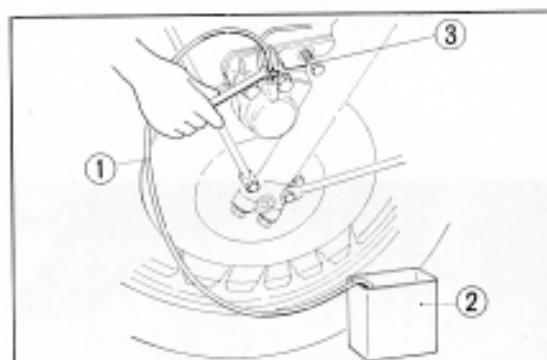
① Bleeder tube ② Vessel ③ Bleeder screw
